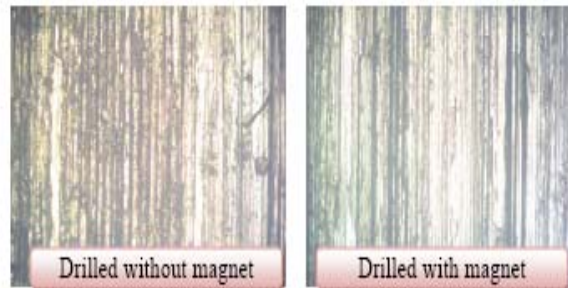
(a) Inside surface of the drilled hole machined without magnet, (b) surface of the drilled hole machined with magnet
